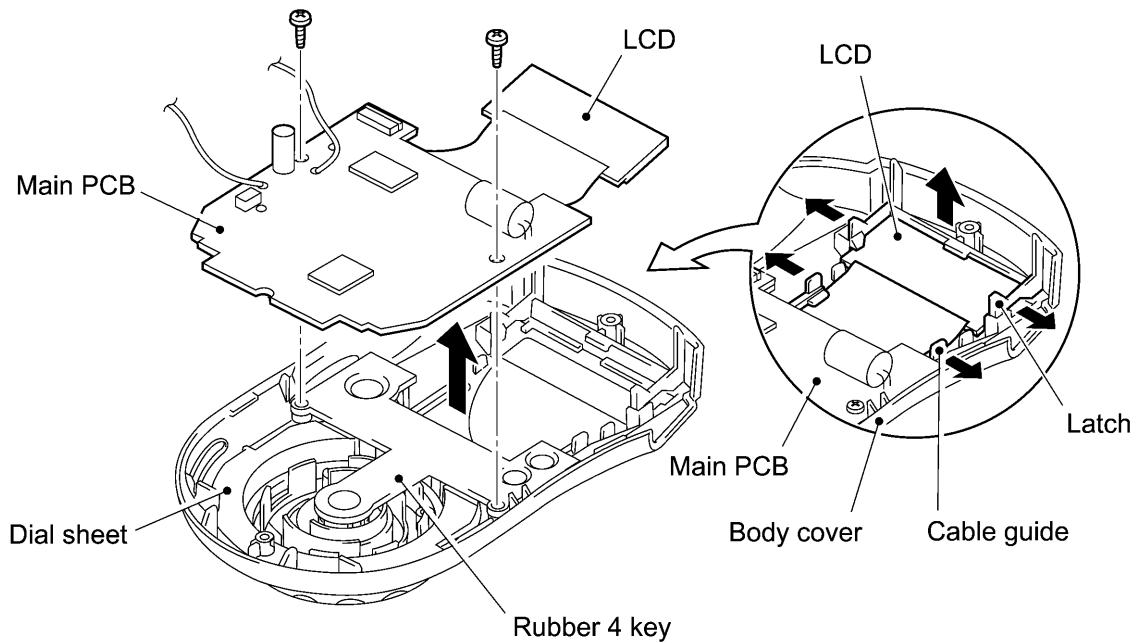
Taking out the Main PCB (with the LCD) from the Body Cover
